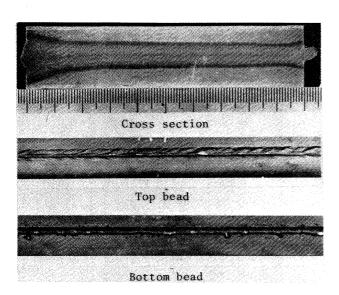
Macrostructure of cross section and bead appearance of EB welds (plate thickness 100 mm, heat input 15.6 kJ/ cm²)
